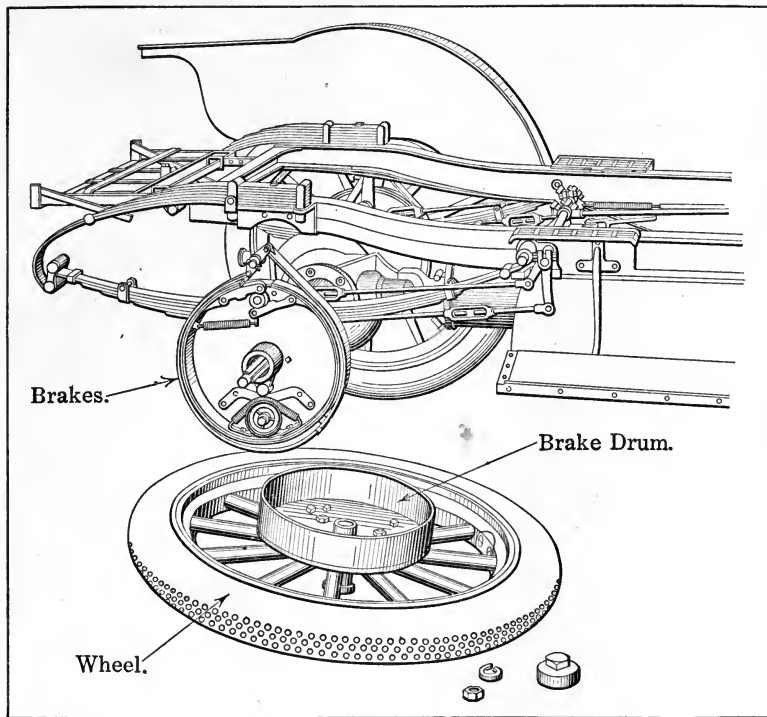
Typical Automobile Brake Assembly with Rear Wheel Removed to Show Application of Brake Drum to Wheel and Internal and External Bands on End of Axle.
